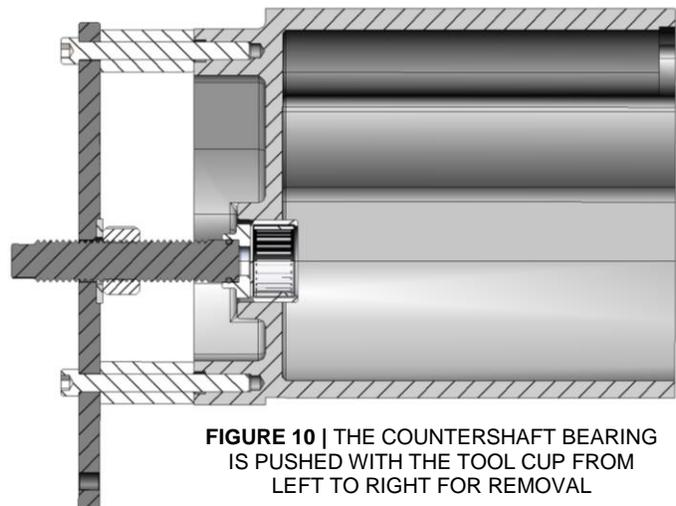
| THE COUNTERSHAFT BEARING IS PUSHED WITH THE TOOL CUP FROM LEFT TO RIGHT FOR REMOVAL
